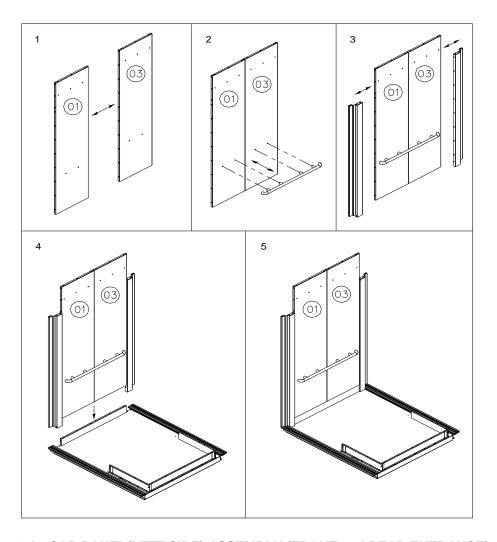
A. CAR PANEL(LEFT SIDE) ASSEMBLY (FRONT and REAR ENTRANCE)
